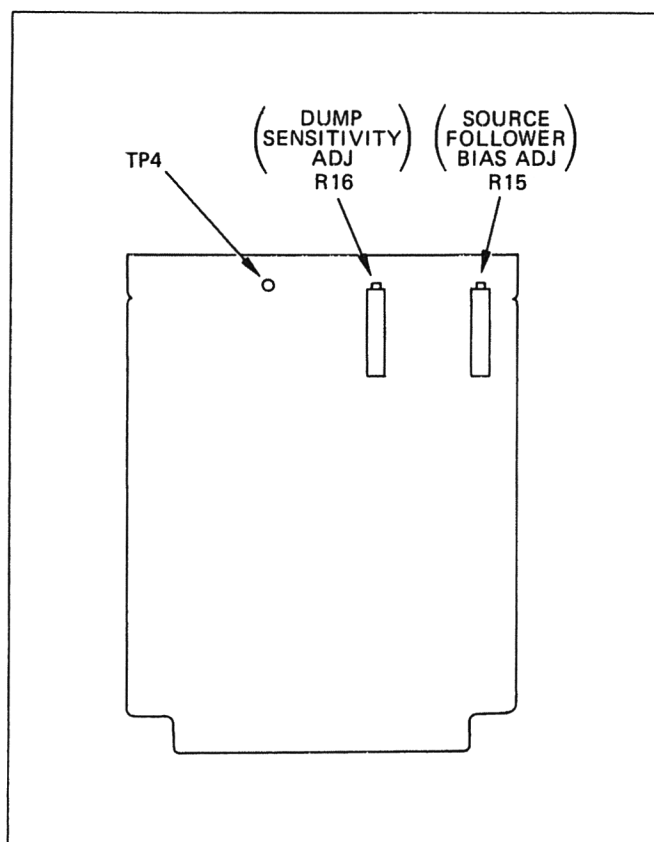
Trimmer Locations, Direct Peak Circuit Assembly, A22
